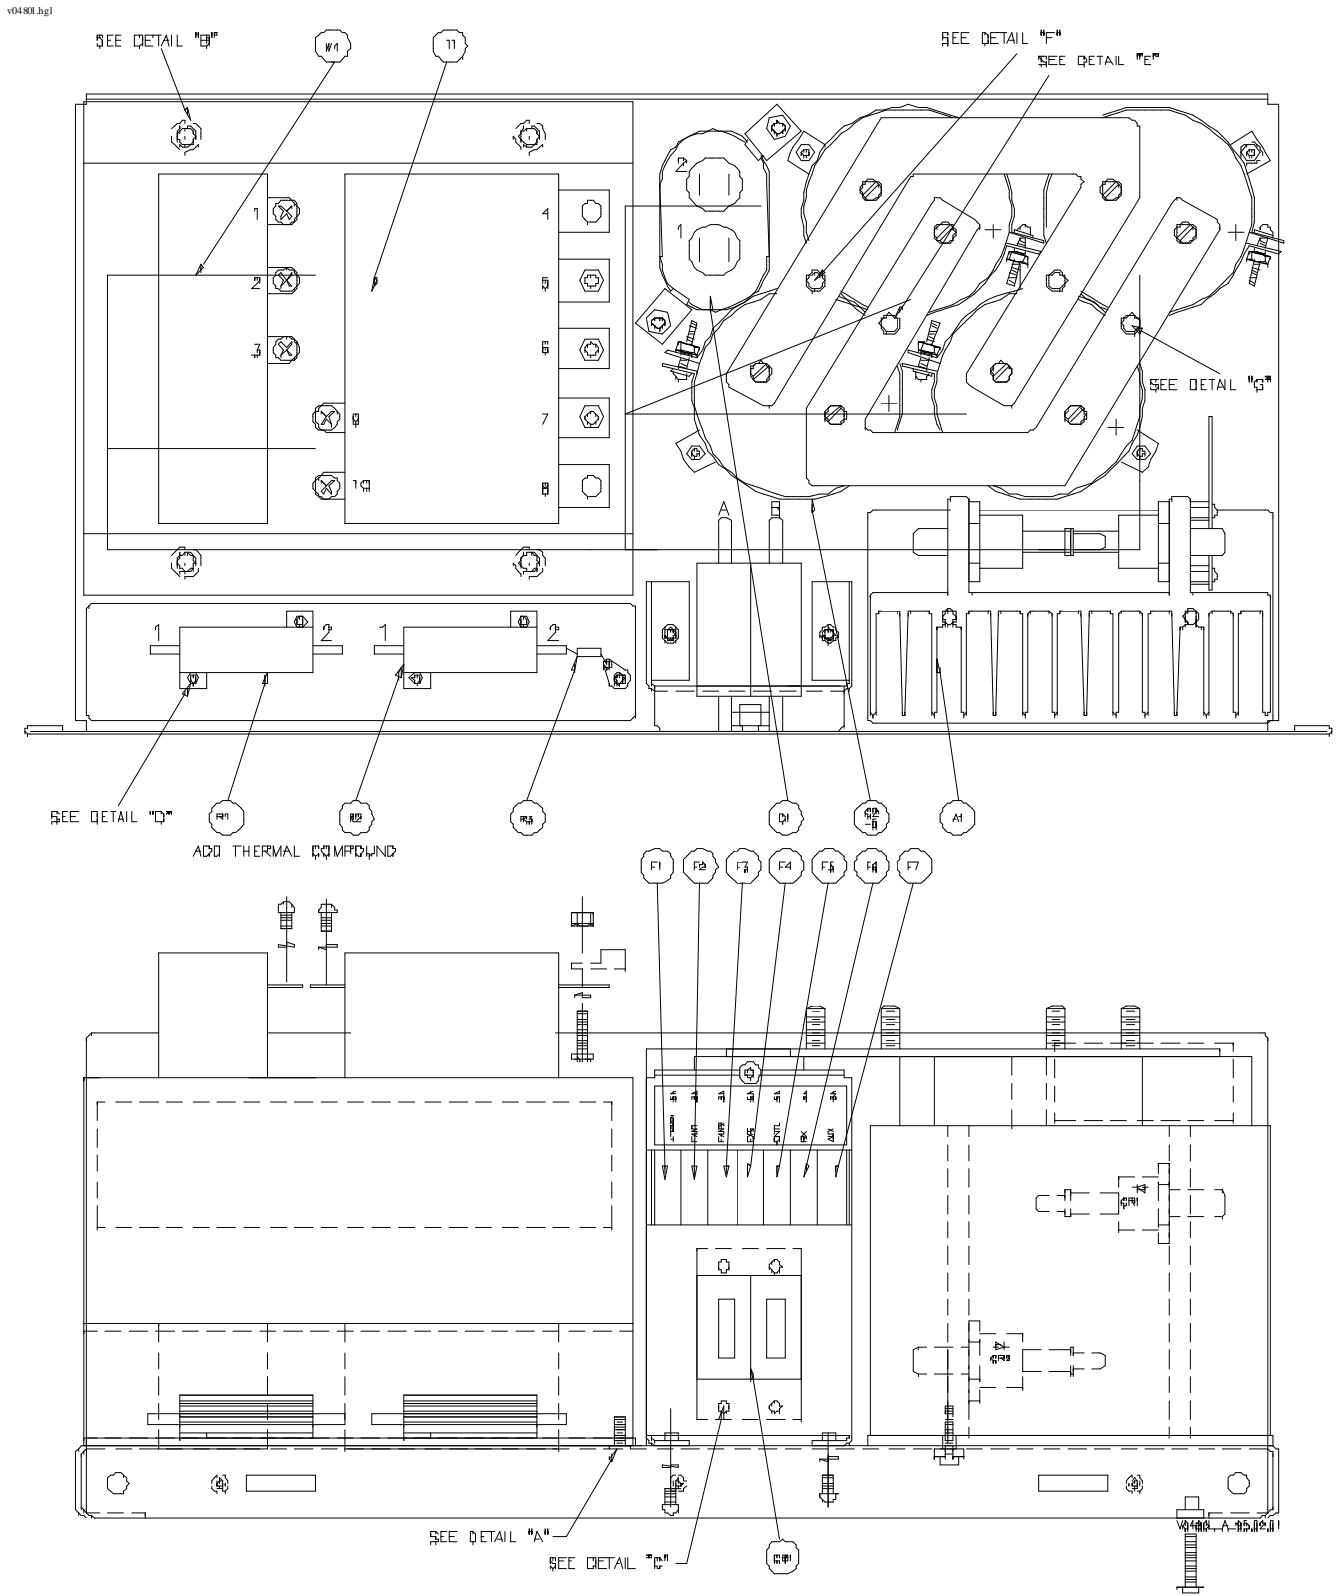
Gold Line 90A Power Supply Assembly 265-0082-006
